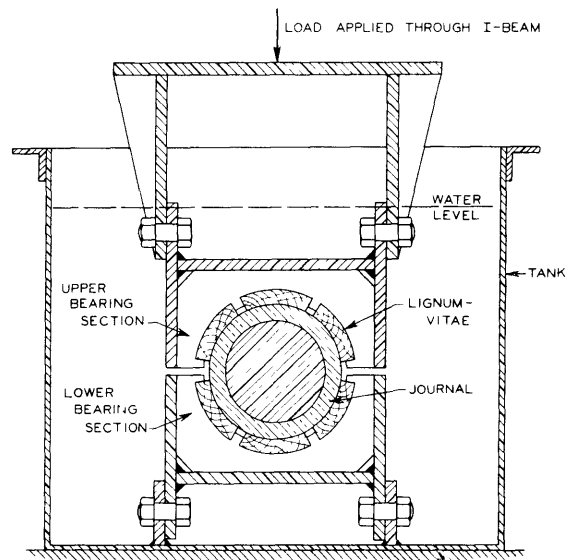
, Arrangement of Bearing for Torsionmeter Method.
